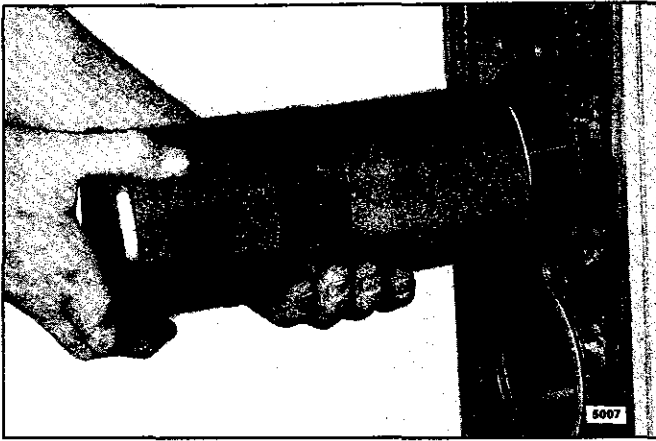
Installing Piston, Rod and Liner Assembly in Cylinder Block
